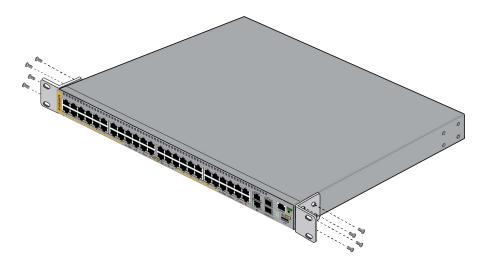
Attaching the Equipment Rack Brackets to the x330-52GTX Switch
